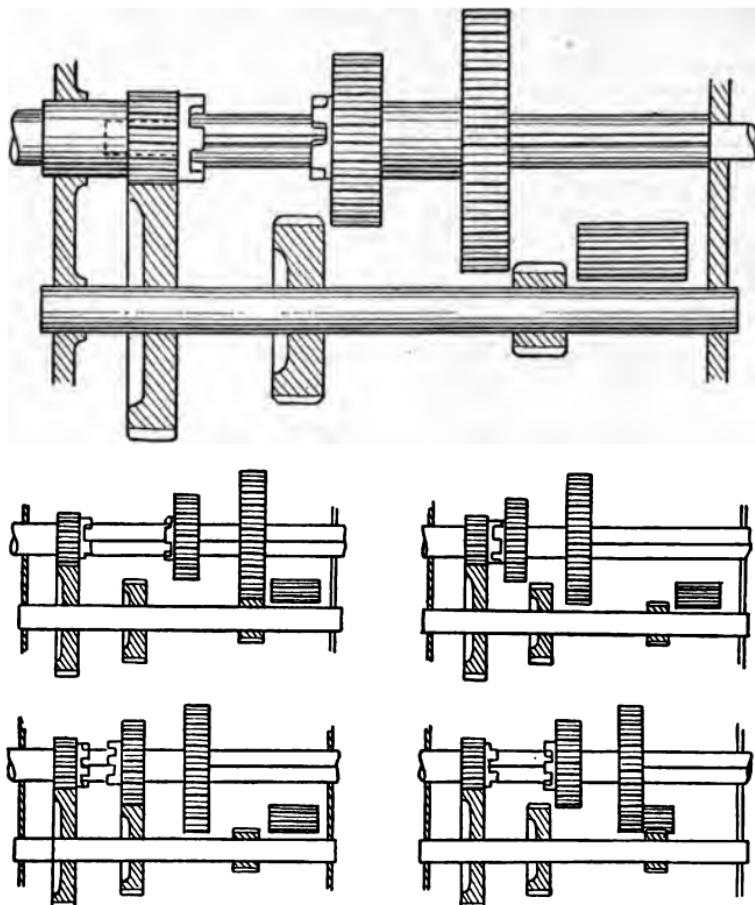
Diagrams of the operations in a type of progressive sliding change-speed gear. As shown in the large diagram, the main shaft is in two parts, that to the left being integral with the clutch shaft, that to the right being journaled into the end of the other. This second part of the shaft is splined, as shown, through most of its length between bearings, carries a sliding sleeve, upon which are carried a small and a large gear. The clutch end of the main shaft carries a small gear, which is in constant mesh with a large gear on the second shaft, which, in consequence, is constantly rotated with the clutch shaft. The first small diagram to the right shows the high speed forward, the direct-drive, obtained by sliding the sleeve on the splined shaft all the way to the left, so that the two elements of the claw clutch engage, and the shaft works as a single unit. The diagram to the left of this shows the low speed, obtained by meshing the large gear on the splined shaft with the small gear on the second shaft, thus driving the large gear and the second part of the main shaft. The lower small diagram on the left shows the intermediate speed, obtained by meshing the larger pinion on the second shaft with the smaller pinion on the splined shaft. The lower small diagram to the right shows the reverse, obtained by sliding the large gear on the splined shaft to the position shown, and driving it from the second shaft by meshing the two with the long idler gear shown at the right in all cuts, and which is slid into engagement by a special lever.
